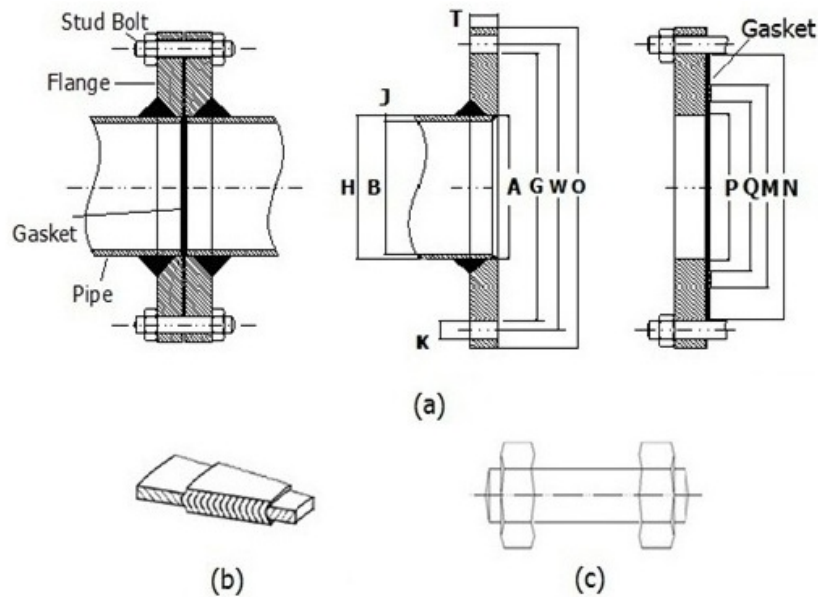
(a) Designed non-standard BFJs and dimensions; (b) spiral wound gasket; (c) stud bolt.
